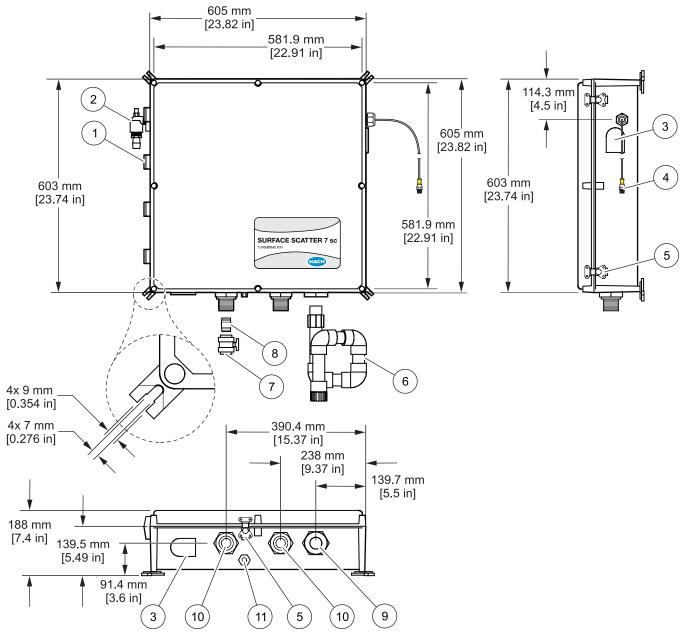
SS7 sc and SS7 sc-HST installation drawing
